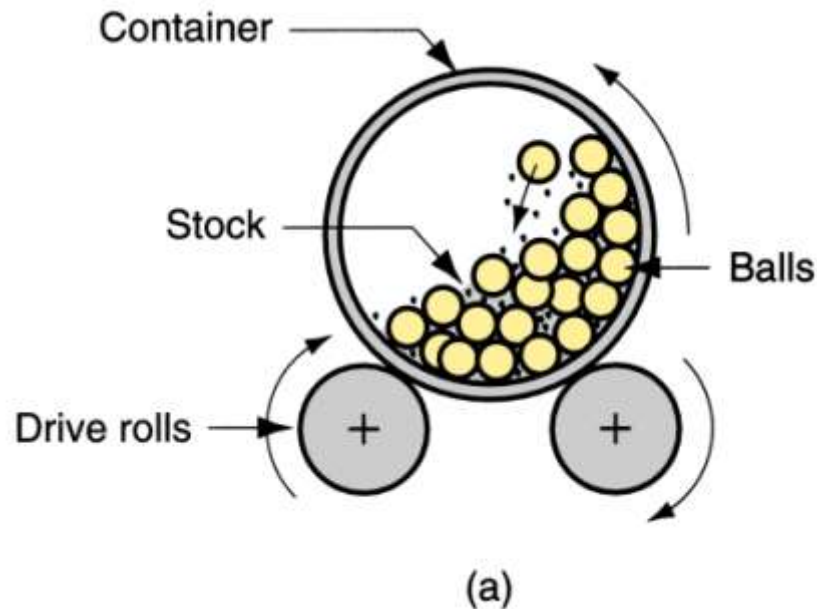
Mechanical methods of producing ceramic powders: (a) ball mill
